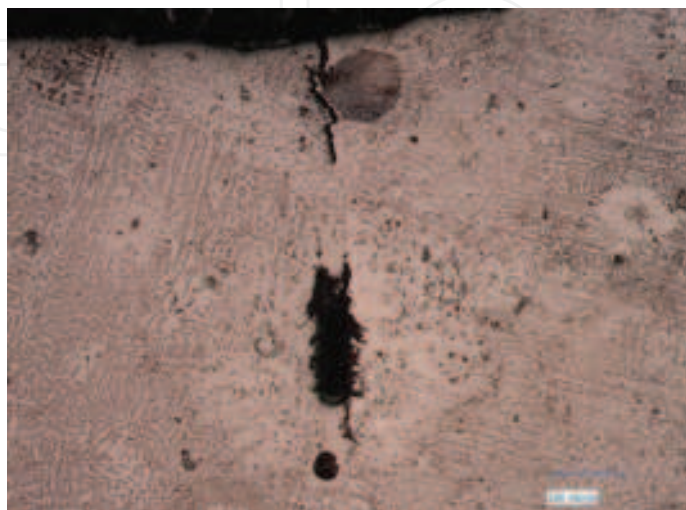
Sample of laser welding by Rofin without filler chemically attacked
